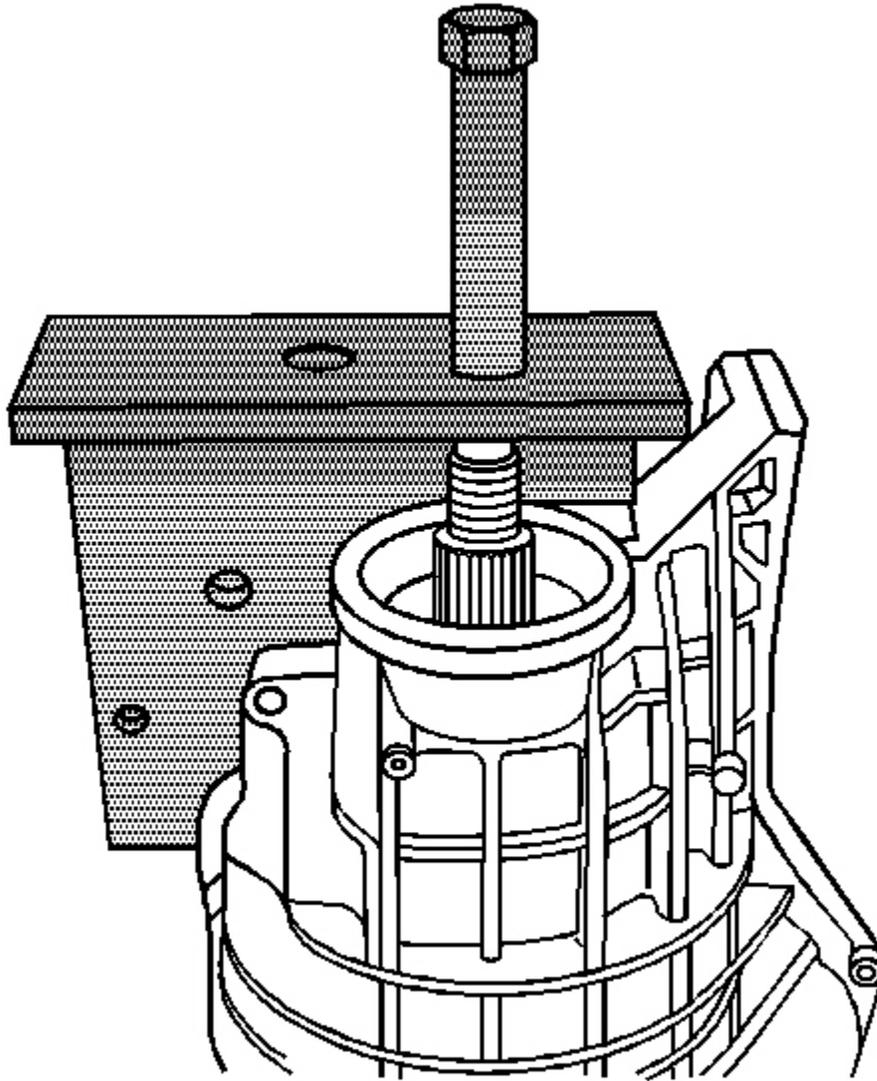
Installing J 45765 To Left Side Differential Carrier Case Half Over Drive Pinion
